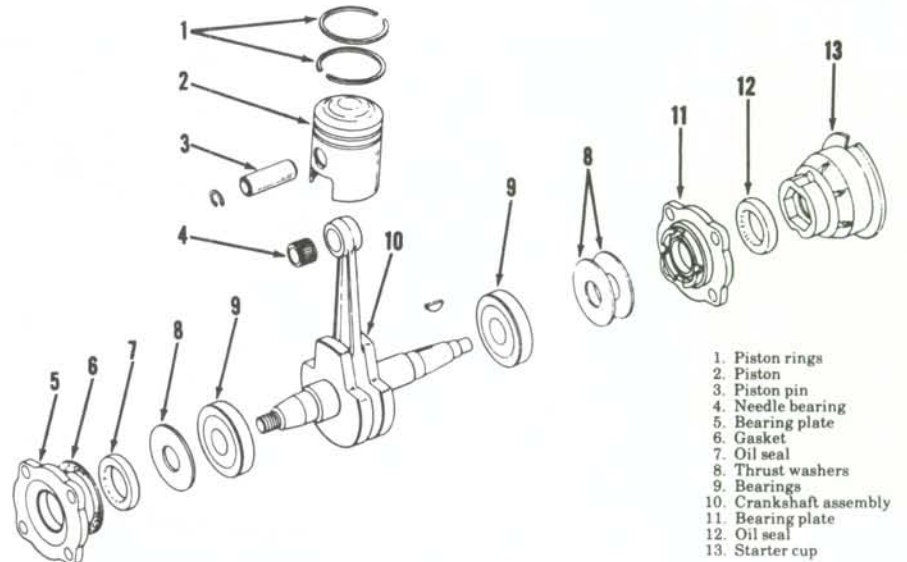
Exploded view of crankshaft, piston and associated parts used on single cylinder models.
